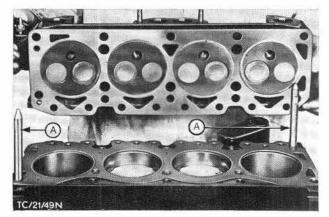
Replace cylinder head. A – Special Tool P-4063-A (locating studs).
